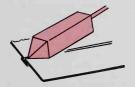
Hold one face of the soldering copper flat against the surface of the metal.
